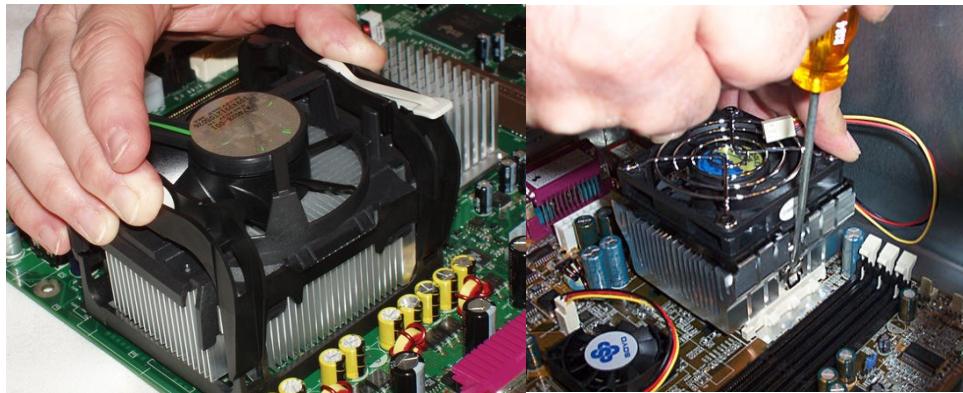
Example of CPU cooler fans with heat sinks installed under them
